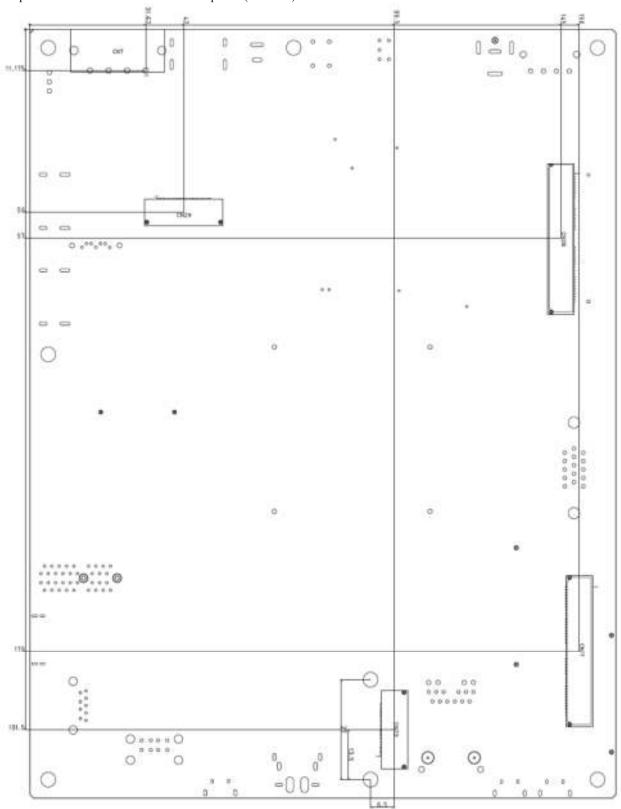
Locations of Connector on the Salvator-X Board (Solder Surface) (Top View)
